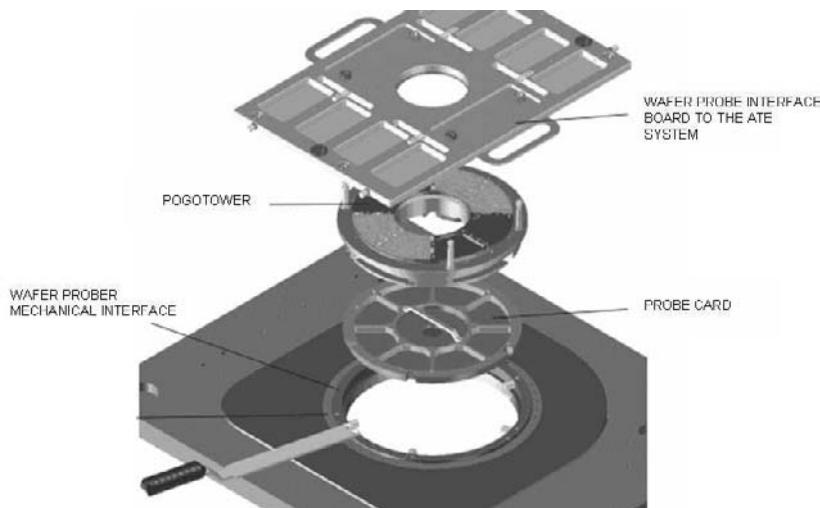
A typical standard wafer probing test fixture setup (courtesy of Verigy).
